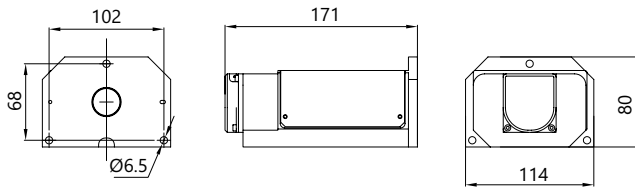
Outline drawing and dimensions of 3 mm fiber bundle
